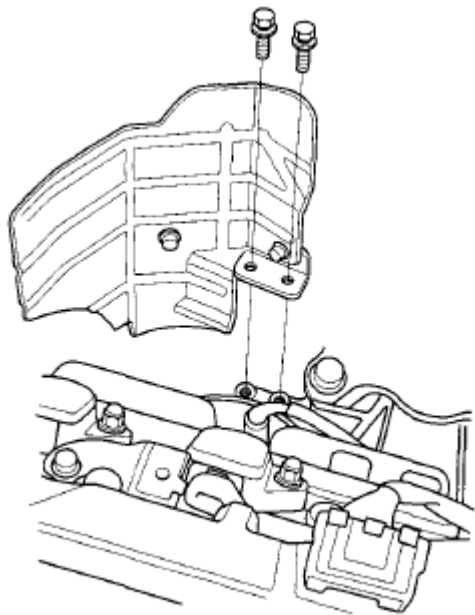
Removing Power Steering Heat Shield From Front Subframe
